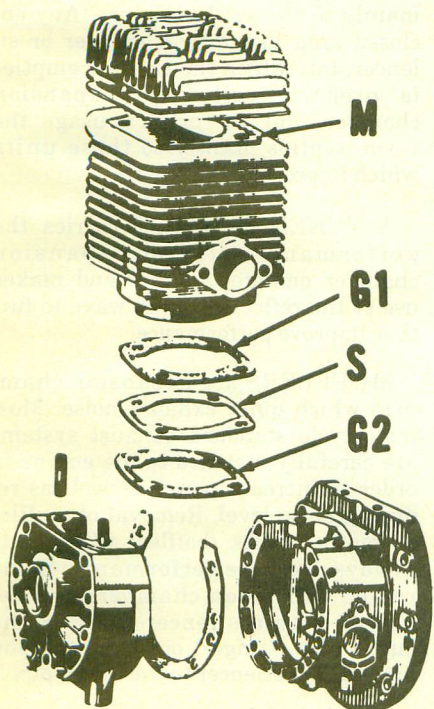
Sometimes a spacer (S) is installed below cylinder to raise the transfer ports. Be sure to note that all ports (inlet and exhaust as well as transfer ports) will be raised. A second gasket (G2) should be used below spacer and combined thickness of spacer (S) and gasket (G2) is the amount that cylinder is raised. The amount that cylinder is raised should be machined from top of cylinder (M).
